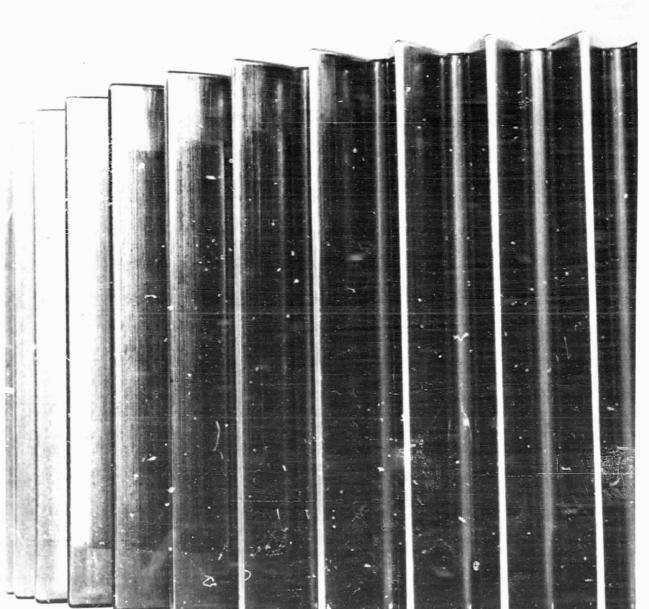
SECOND STAGE PLANET TOOTH SURFACES ~ RING GEAR CONTACT
